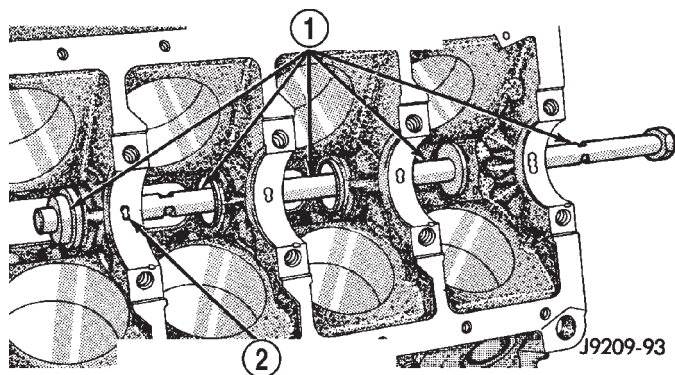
Camshaft Bearings Removal/Installation with Tool C-3132-A
